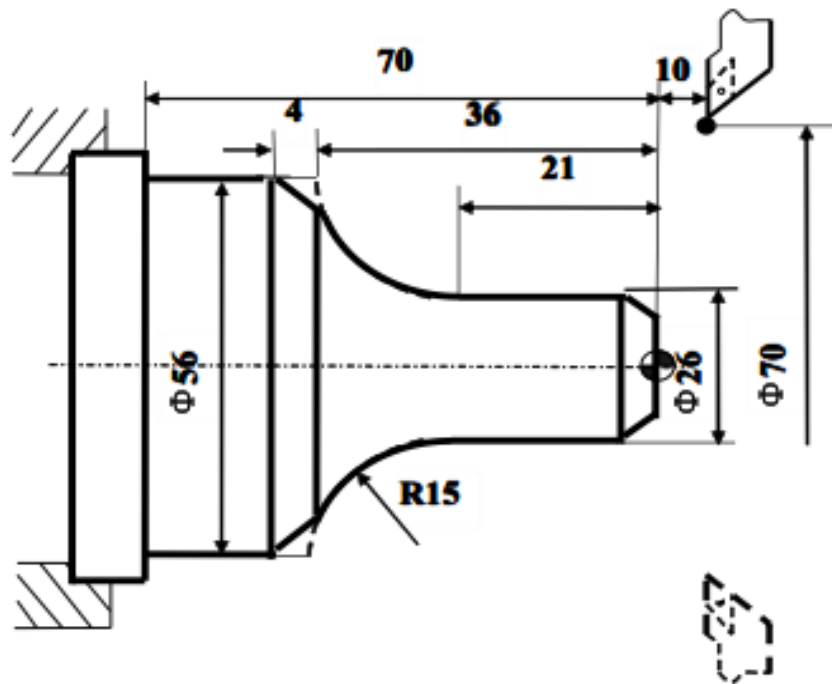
Chamfering and Rounding (G02/G03) - Example
